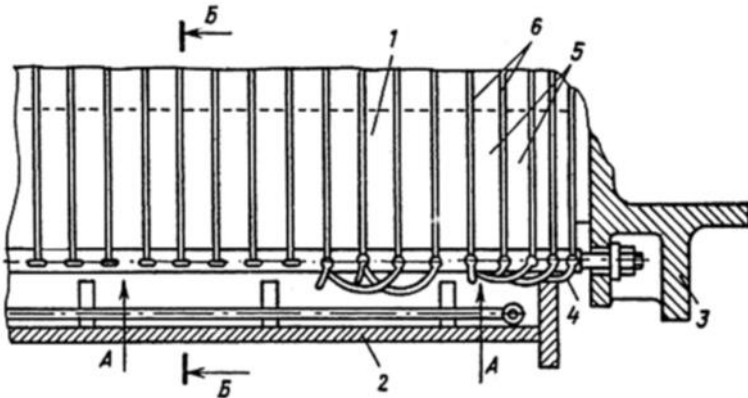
Longitudinal Section of the Stator Core of a T3B Turbine Generator with Coolers.
